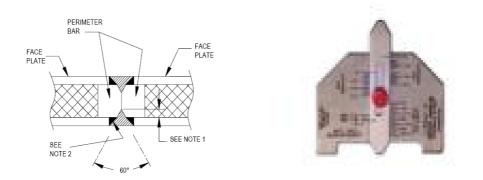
1 - panel weld preparation drawing (left) and fillet weld gauge (right).
